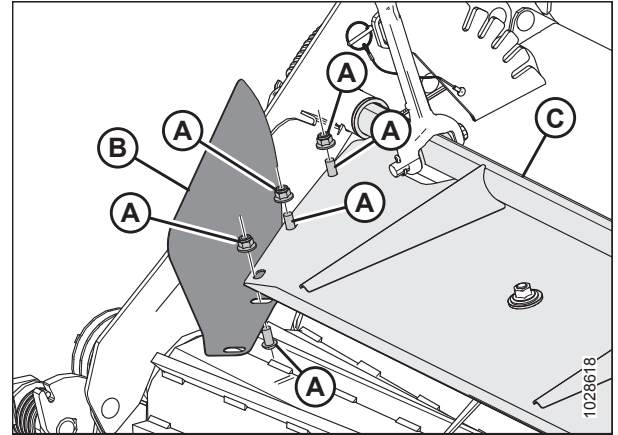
Deflector and Rear Baffle — View of Deflector Underside, Right Side of the Header
